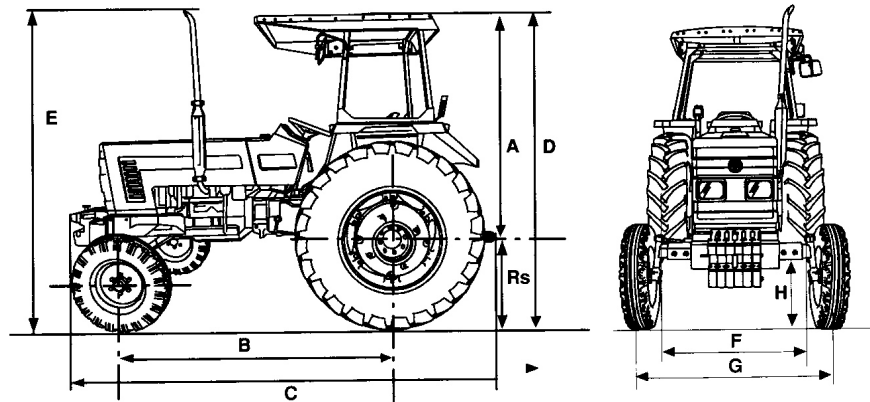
General dimensions of New Holland 60-56 agricultural tractor
